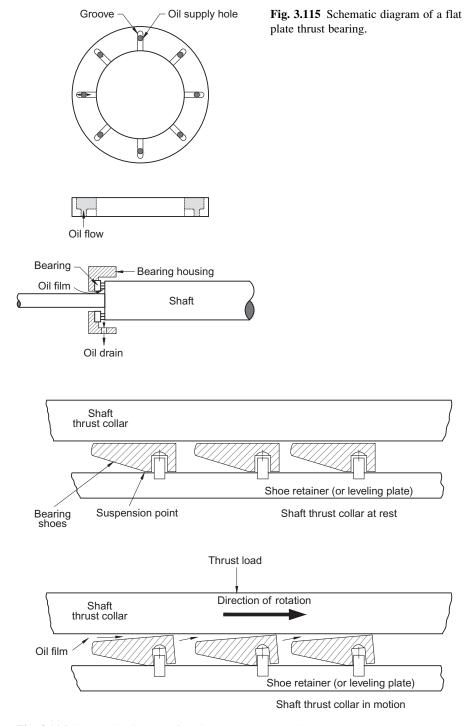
Schematic diagram of a Kingsbury thrust bearing.
